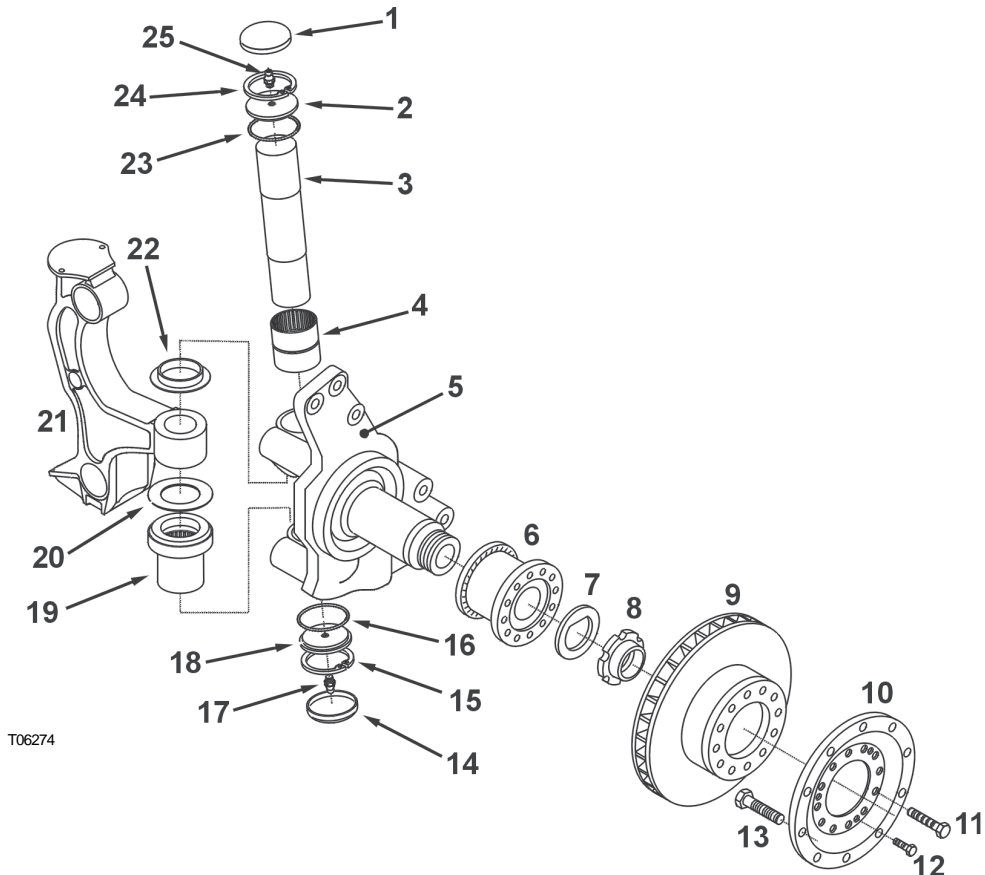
Exploded view, front axle end with "non maintenance-free" steering knuckle bearings
